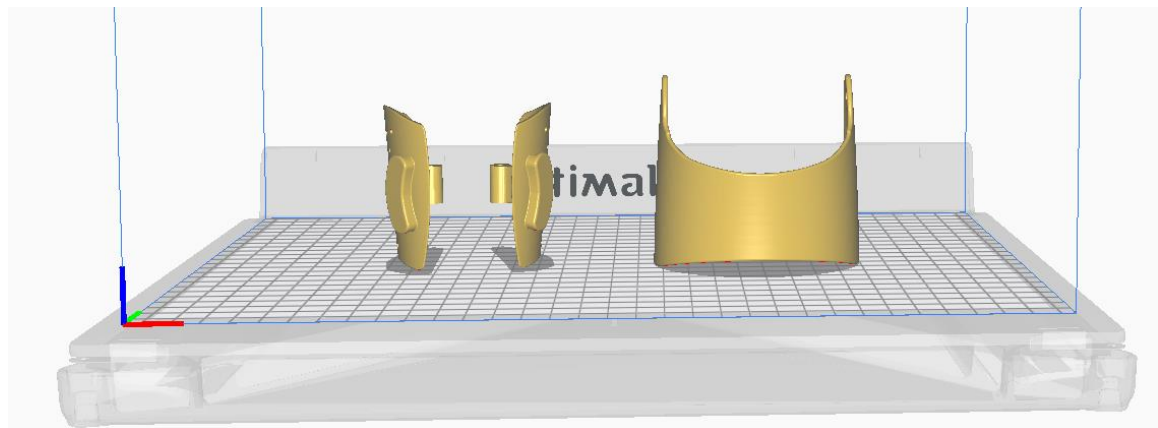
Printing orientation of the adjustable wings and the upper attachment. The parts will be printed perpendicular to the printing bed to avoid having their layers separated due to the applied forces of the tensioner lace and the Velcro closure, respectively.
